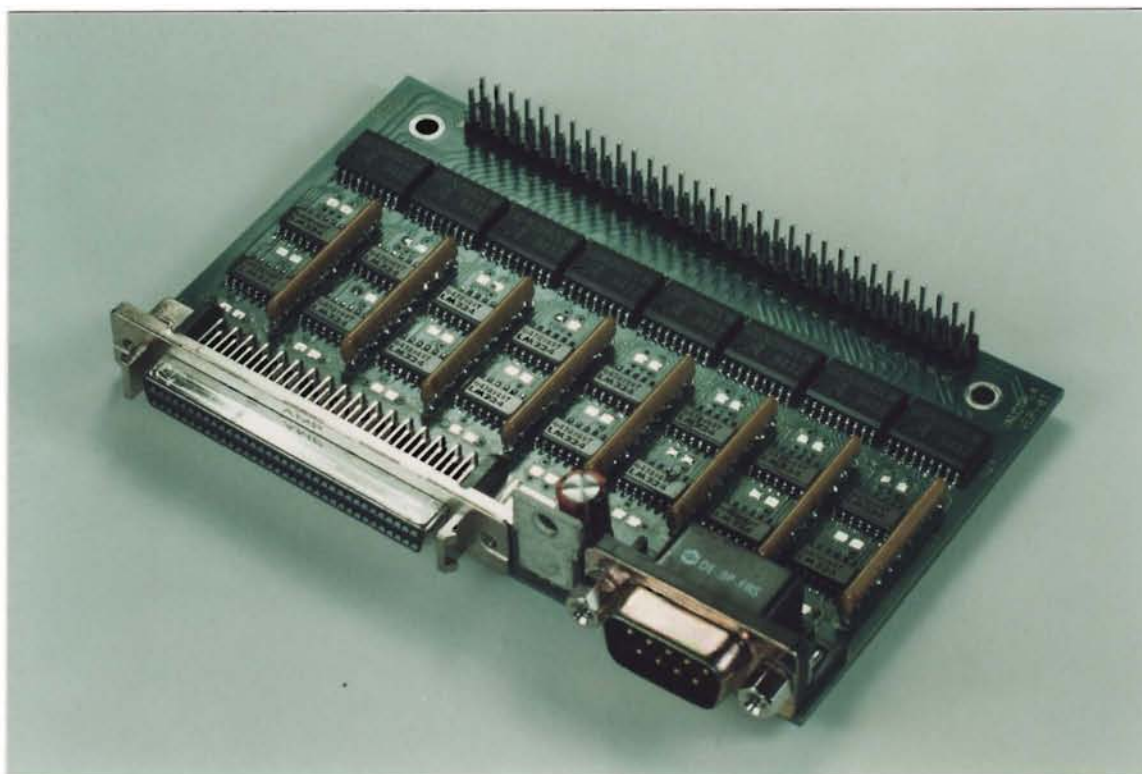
PCB-version of the 64-channel PWM controller and driver for the tactile display valve modules. SMT technology allowed reducing the board size by a factor of approximately 6 over the original wirewrapped design. DB-9 connector at lower-right is for +24V power and the PWM oscillator. (Photo. GC160595A-08)
